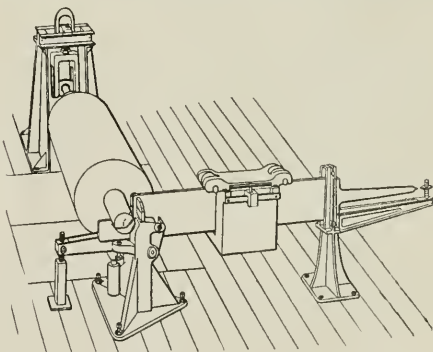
MARTIN ROTOR-BALANCING MACHINE
